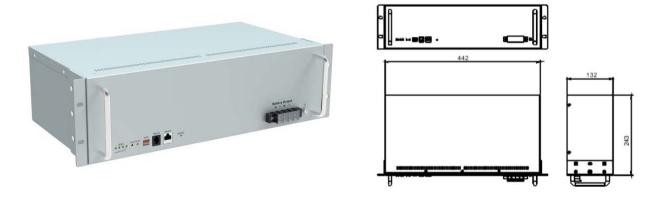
Appearance and Mechanical Drawing of U3C-30P-48V-A
